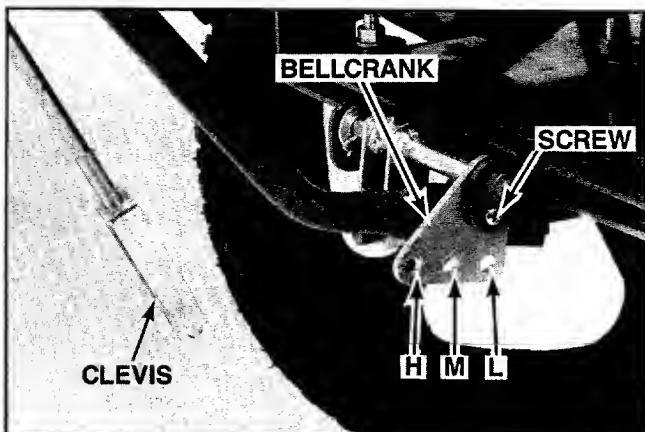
Clevis attaches to bellcrank. Do not remove alignment screw and nut during attachment steps.
